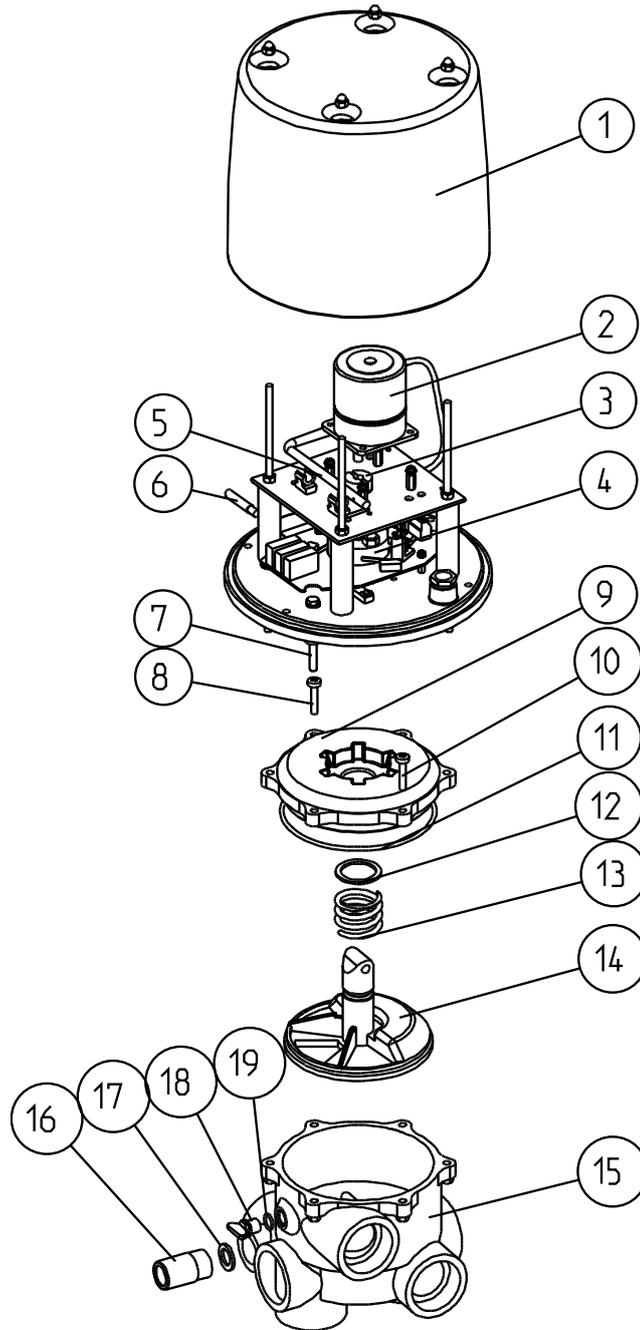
Exploded view of F 600 A automatic multi-way valve with automatic actuator
